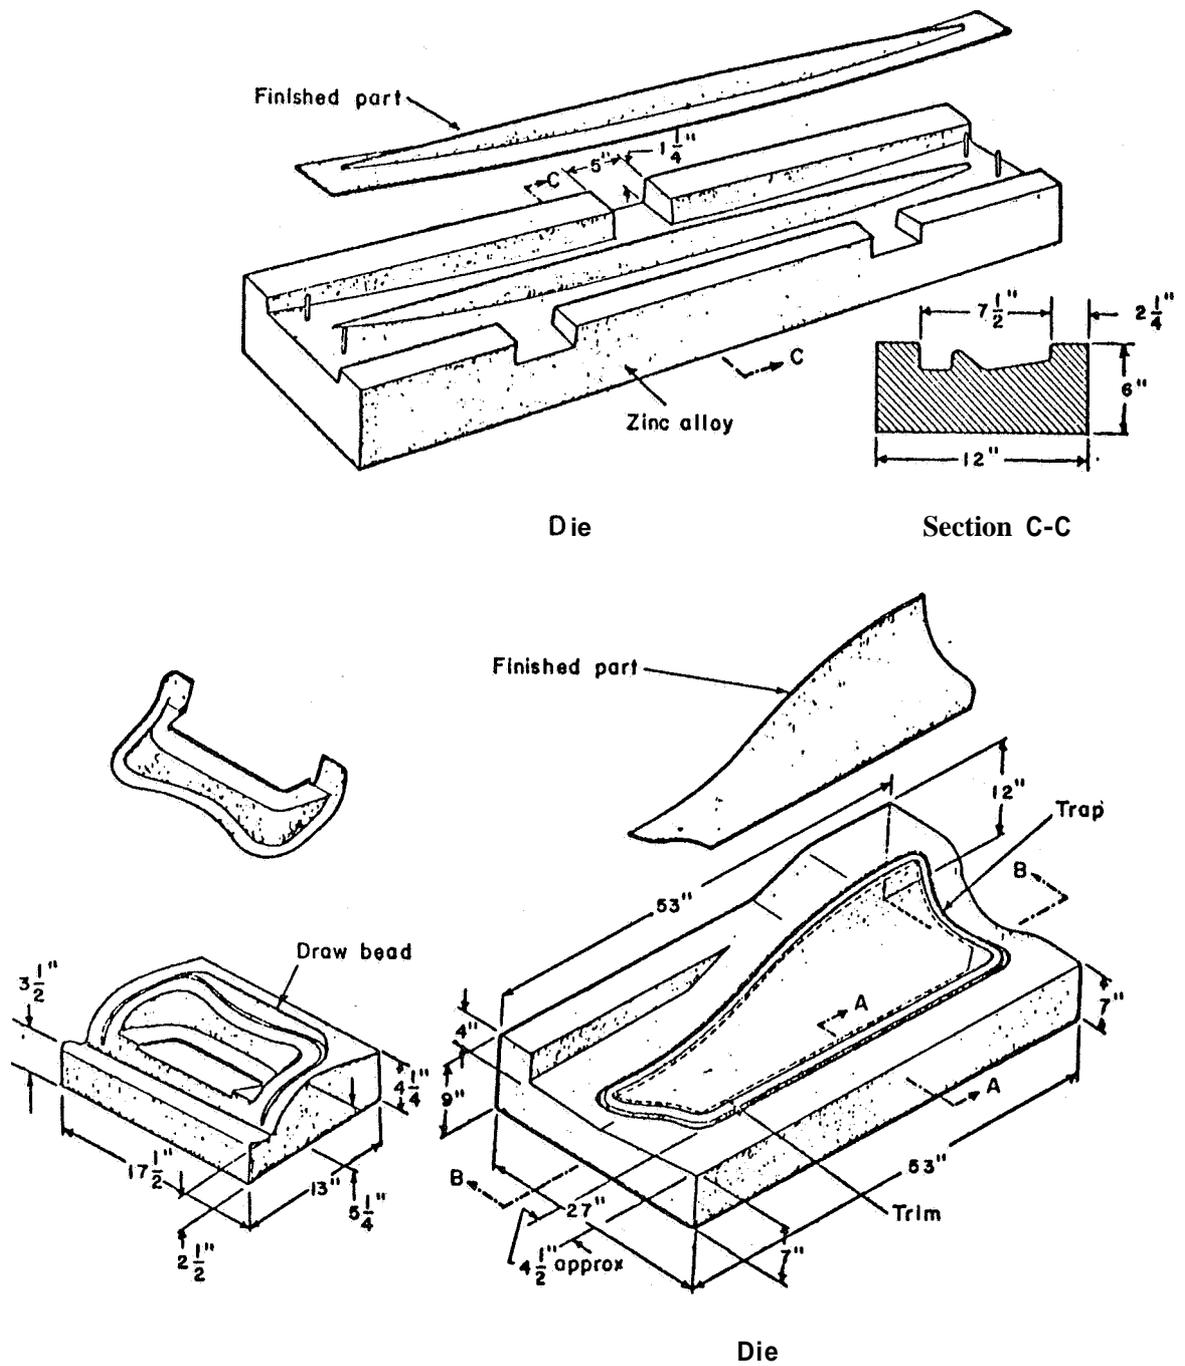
TYPICAL DROP-HAMMER DIES AND FORMED PARTS (Ref. 78)
